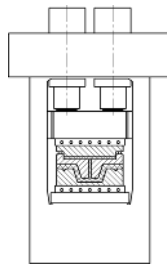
Transfer moulding machine shown with moulding material fed into the moulding cavity
